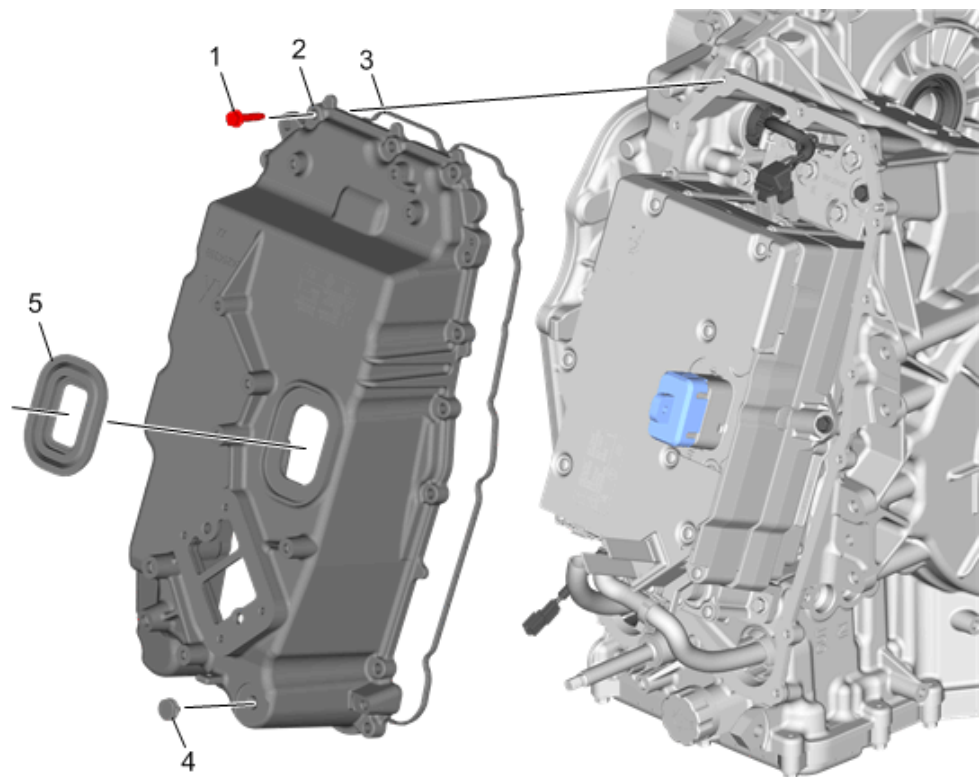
Drive Motor Power Inverter Module Cover And Components
